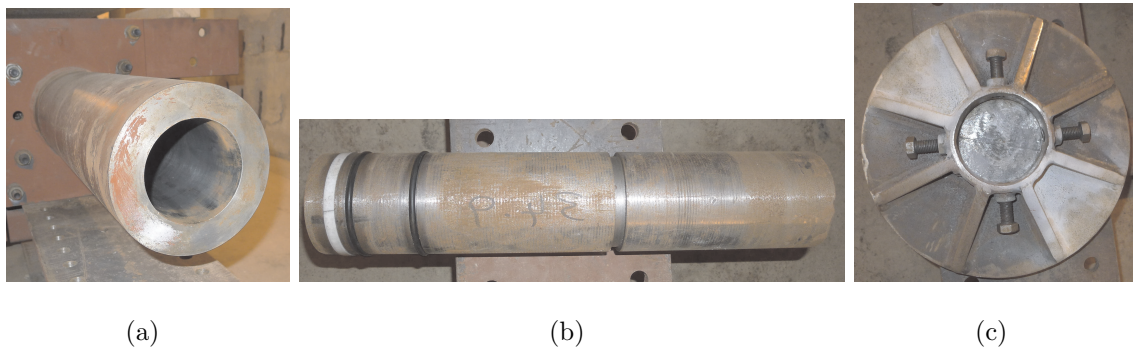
Detail of gas gun barrel and projectile components. (a) Barrel, (b) Piston with one white PTFE guide, two black rubber O-Rings and an empty location slot for the second guide, (c) Front plate with connecting bolts.
